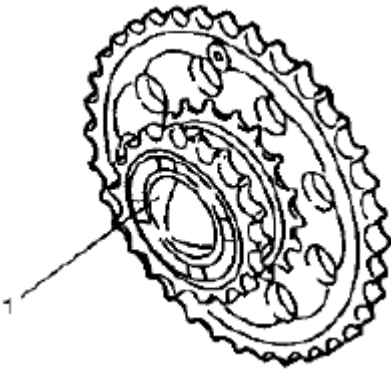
Identifying Idler Sprocket Teeth & Bush
